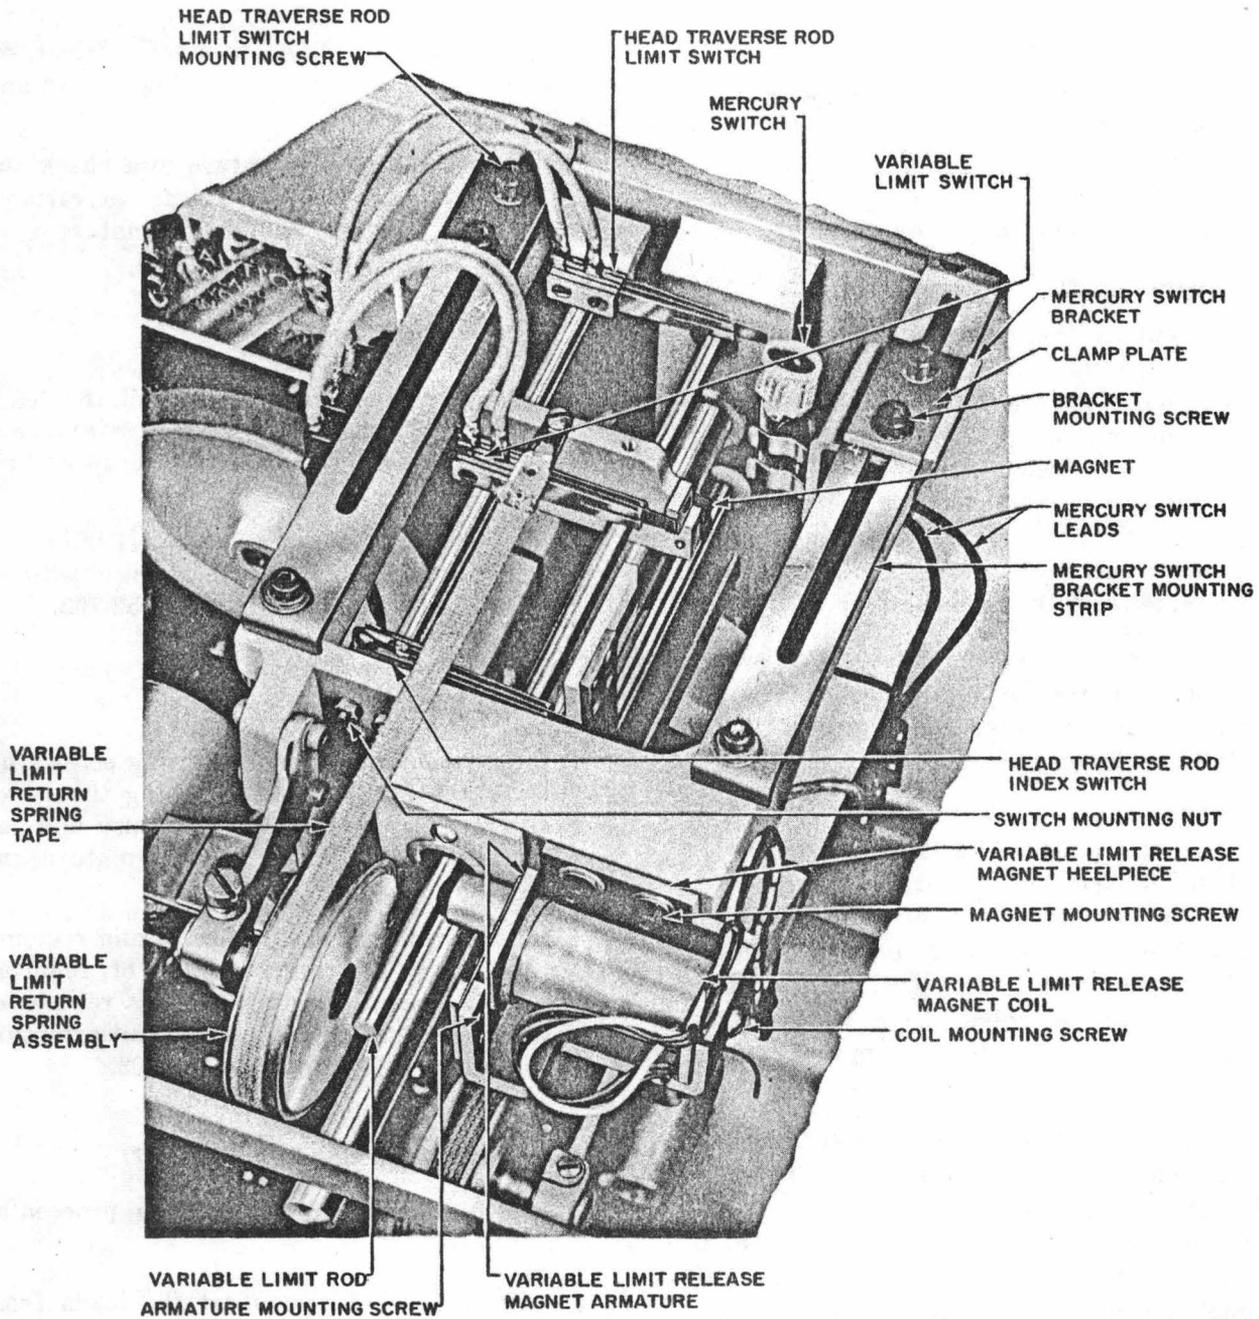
Recorder-Replicator Mechanism — Partial Top View
